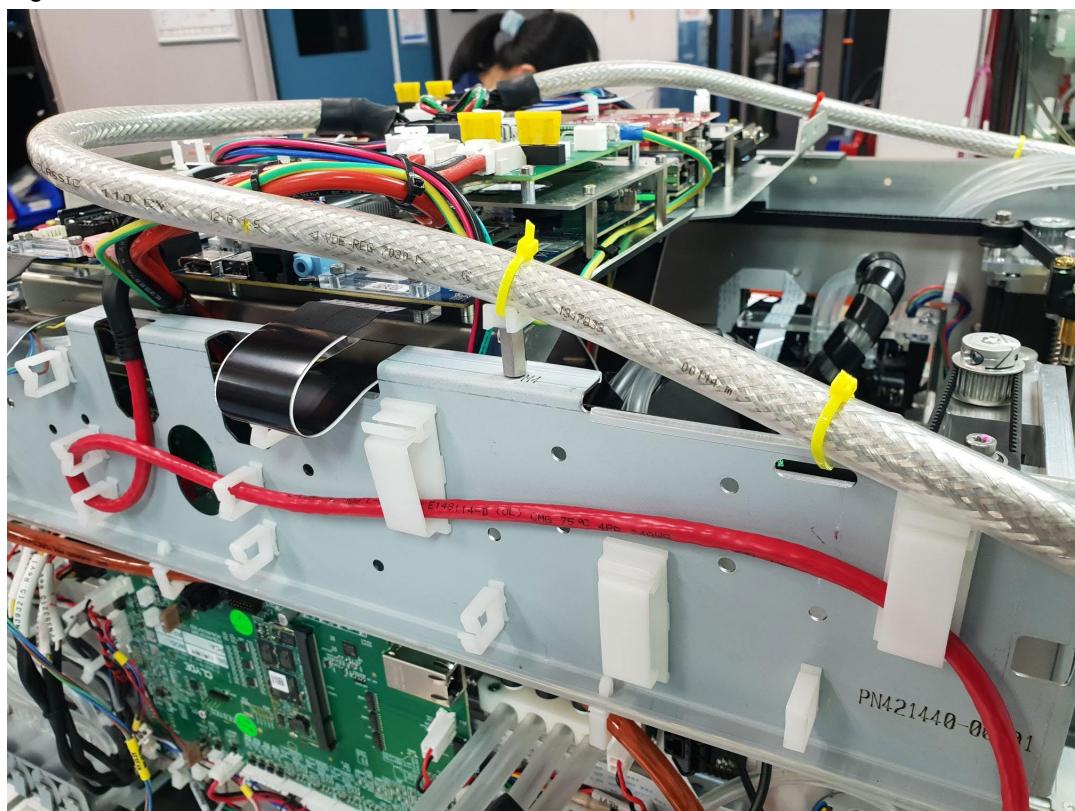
Print Module Power Cable – Cables routed out SUPPLY tube side
